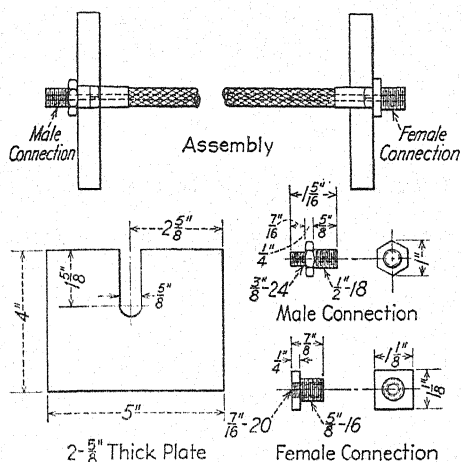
Parts to be Assembled on Hose for Tensile Strength Test.
